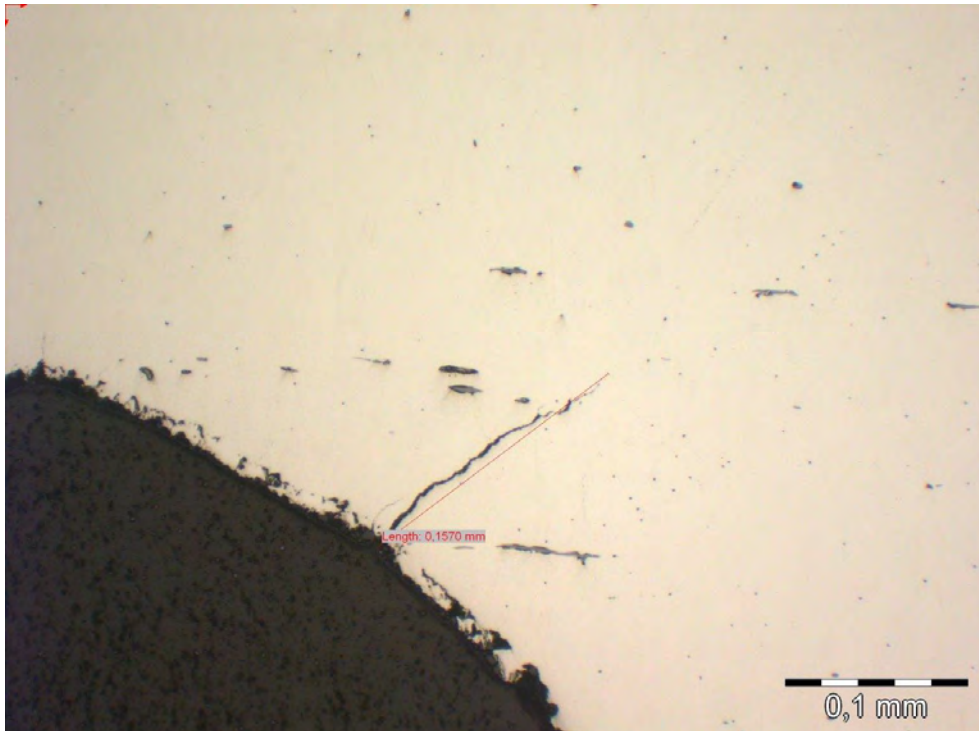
Crack at segment A, second ridge on barrel no. 14389
